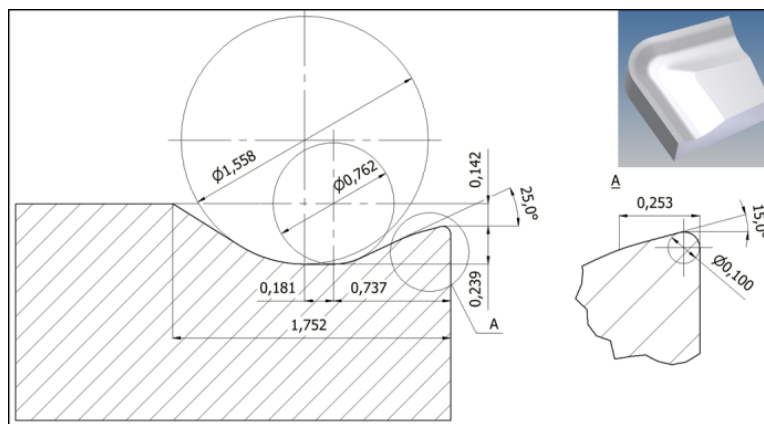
Dimensioned cross-section of Kennametal cutting insert type CNMG 120412-UP with CAD model of tool edge used in FEM simulation [6]
